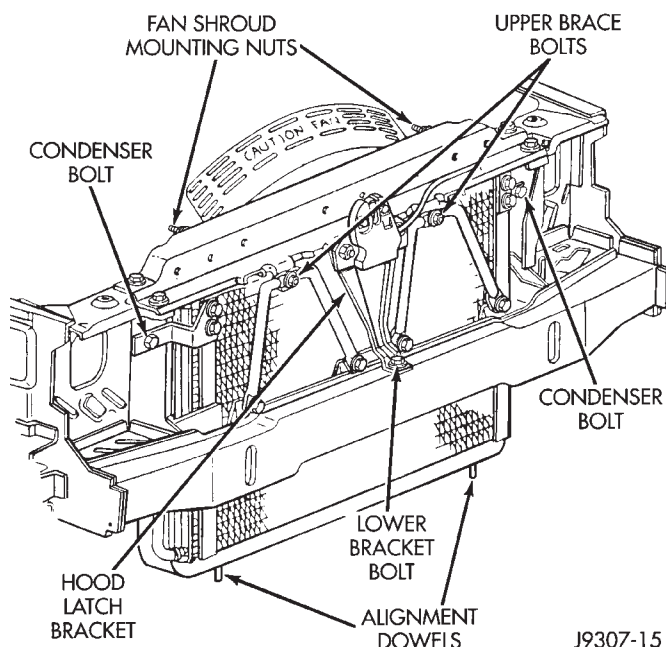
Radiator—A/C Condenser Mounting—Typical
